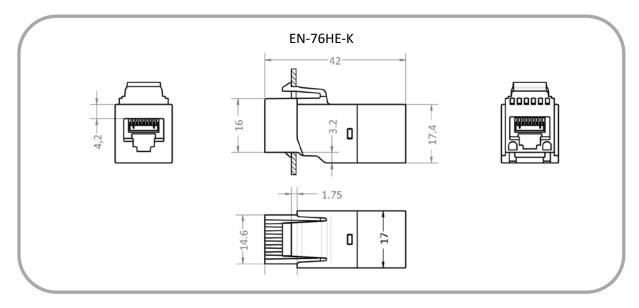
Technical drawings for EN-76HE-K. All dimensions are in millimetres.
